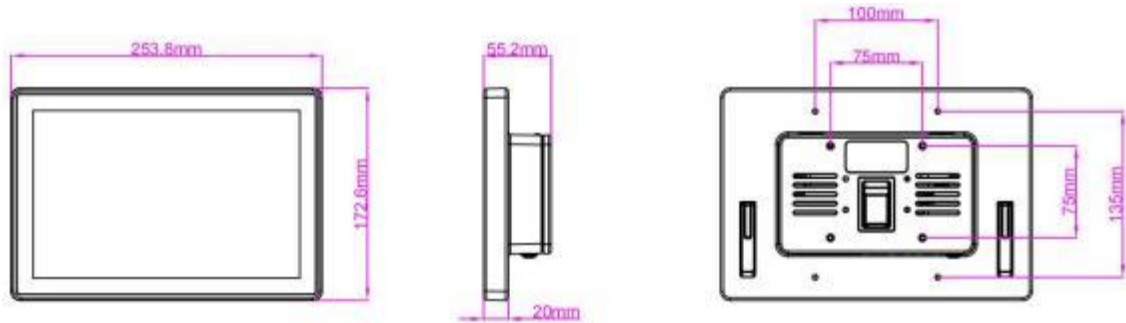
Smart Panel Q10 Mechanical Dimensions
